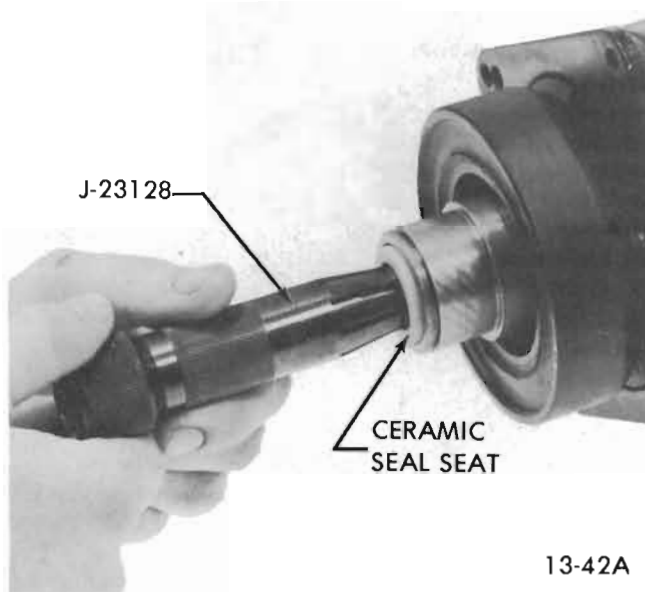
Removing or Installing Ceramic Shaft Seal Seat
